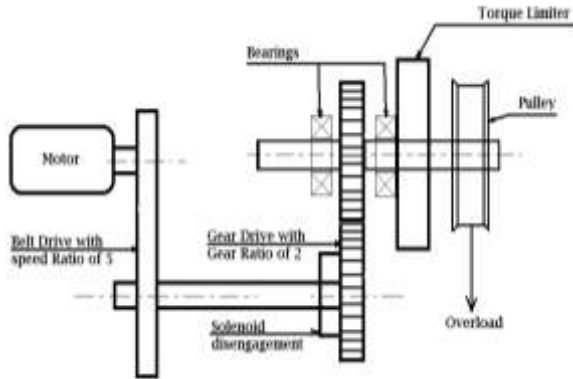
Shaft drive mechanism (with Spring Ball Clutch)
